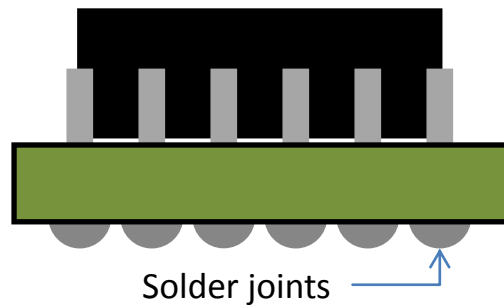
Example of a through hole mounted electrical component soldered to a circuit board on the side opposite its insertion
